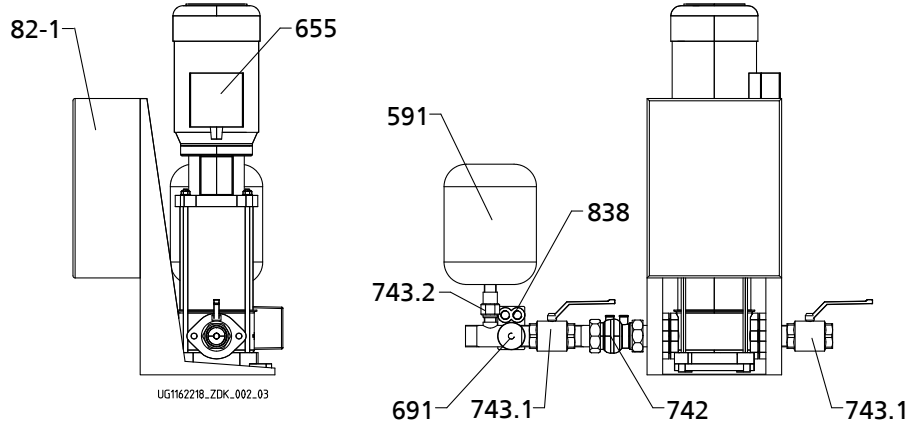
General assembly drawing of DeltaSolo D with Movitec 2, 4, 6, 10
